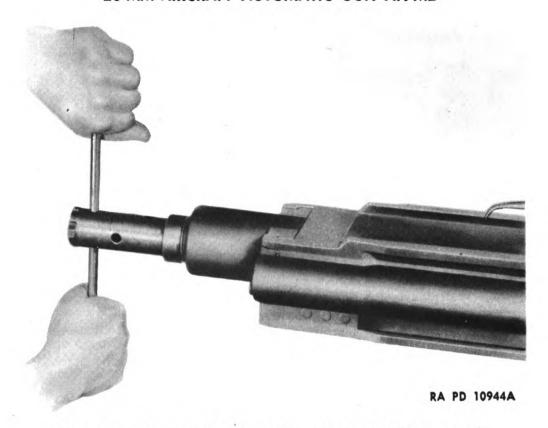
Unscrewing the Driving Spring Guide Assembly
